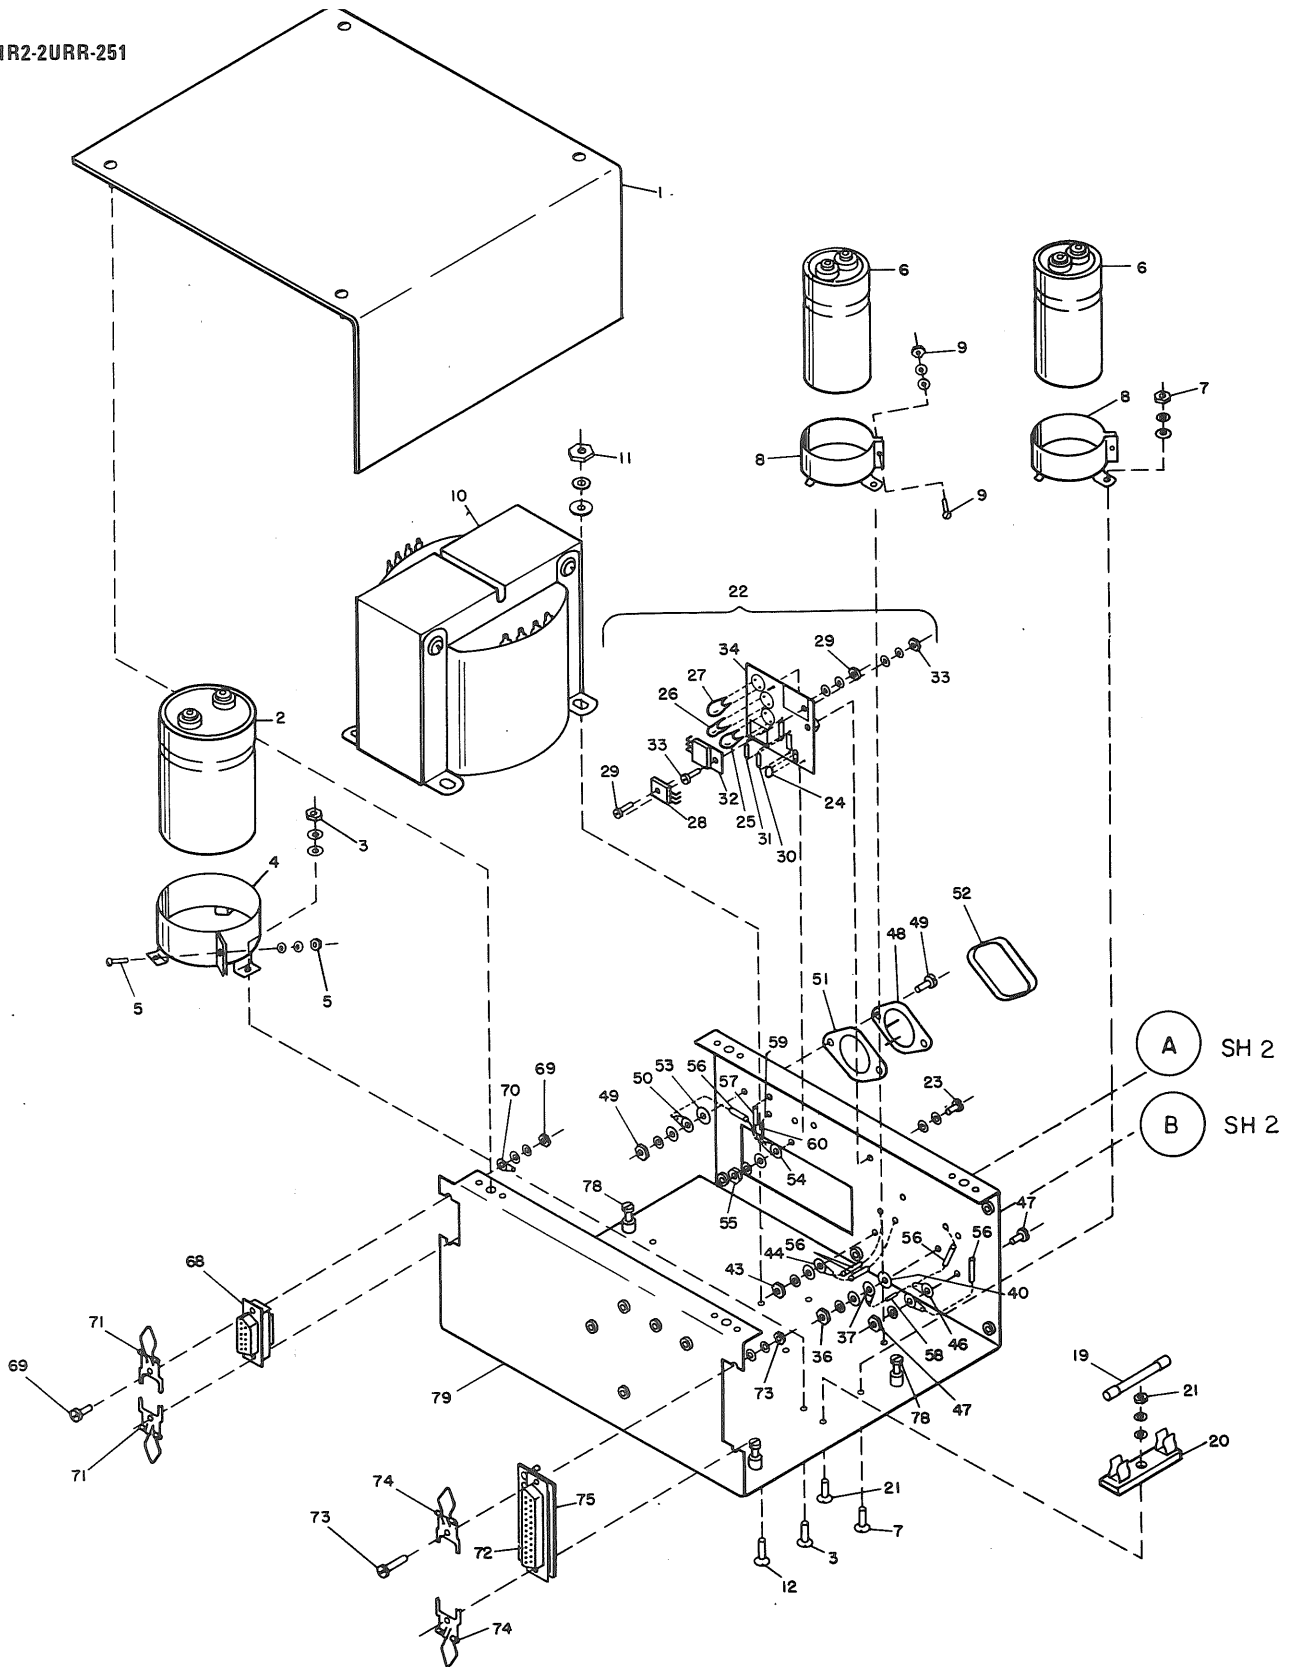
Power Supply Assembly, Module, A10 (Sheet 1 of 2)
